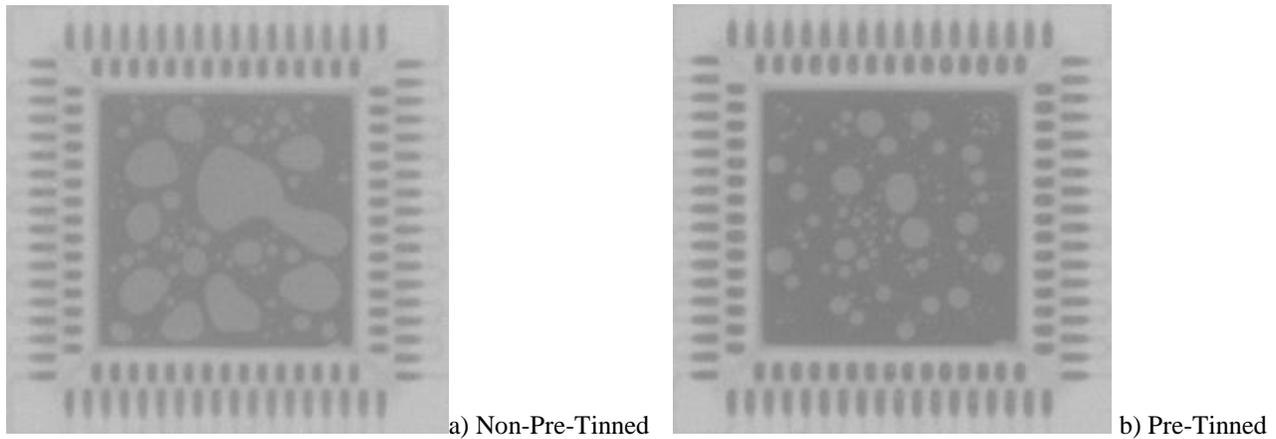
X-Ray Images of QFN132 Solder Joint Assembled with Non-Pre-Tinned Component vs. Pre-Tinned Component.
